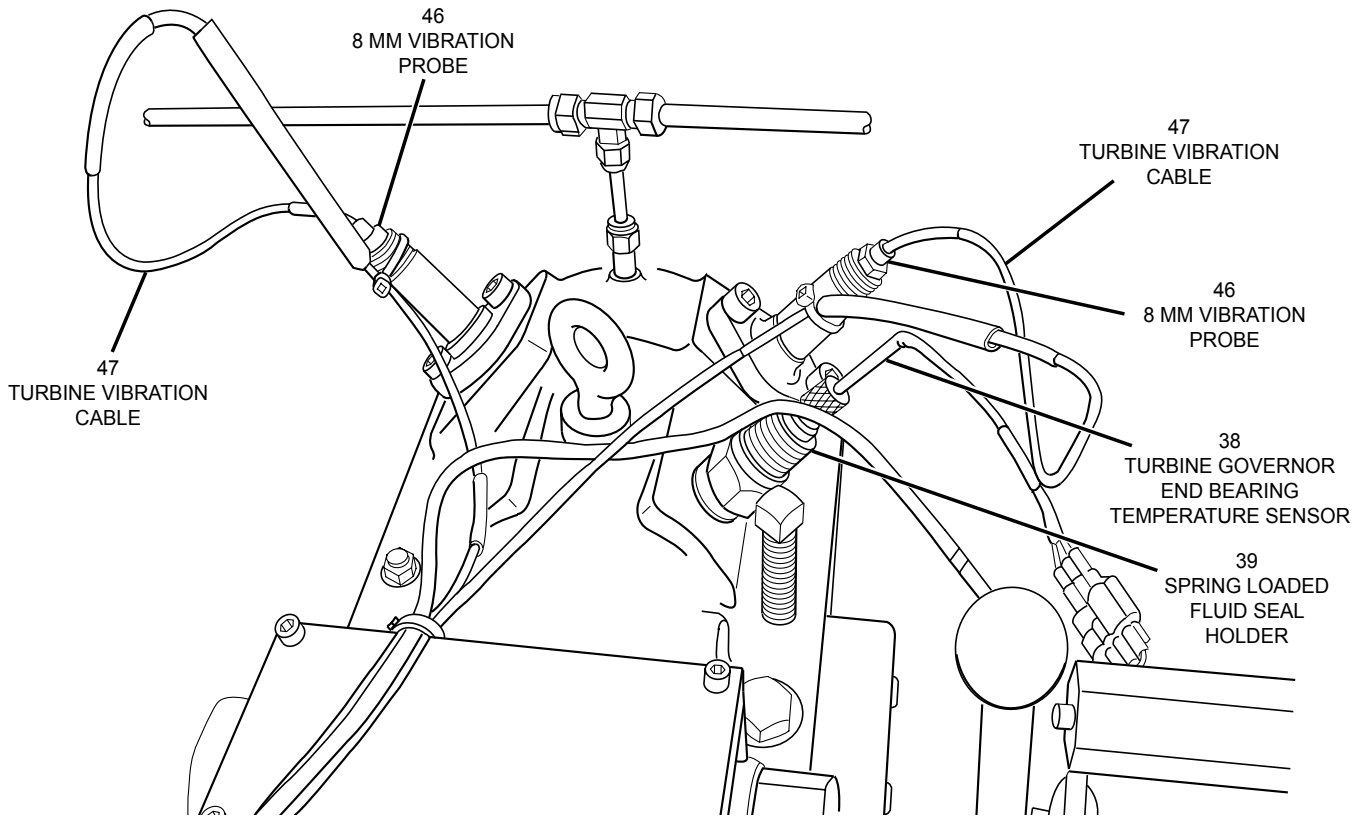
KD TURBINE GOVERNOR END BEARING
